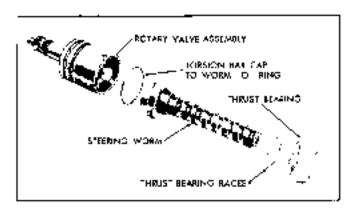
Exploded View of Worm Shaft and Ratery Valve
